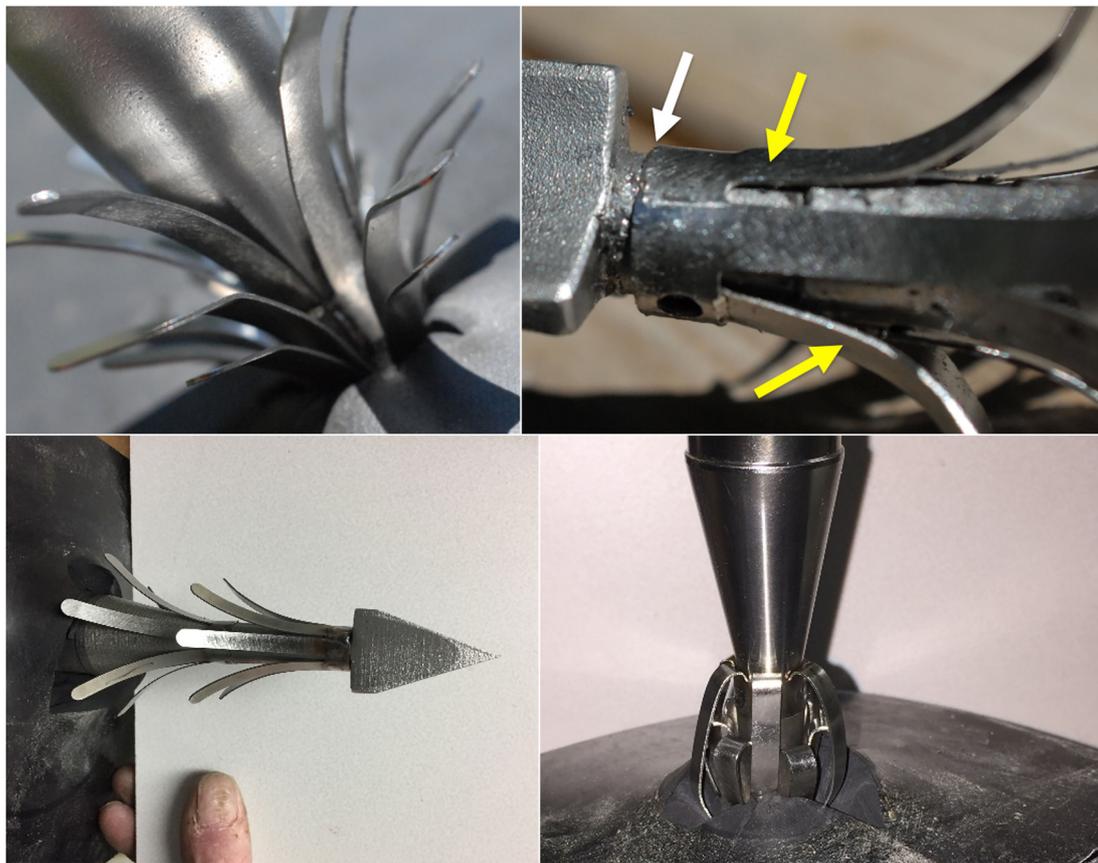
Impact tests to assess petal skirt welding and petal strength. Top left: Intact petal skirts deployed on hard durometer rubber with a pneumatic rifle. Top right: Detail of the petal skirt welding joint (white arrow) and the petals (yellow arrows) upon penetration through hard durometer rubber after high-speed deployment with a pneumatic rifle. Bottom left: Intact petal skirts after low-speed insertion experiment through neoprene rubber. Bottom right: bent (but not broken) petal set during a pull-out exercise.
